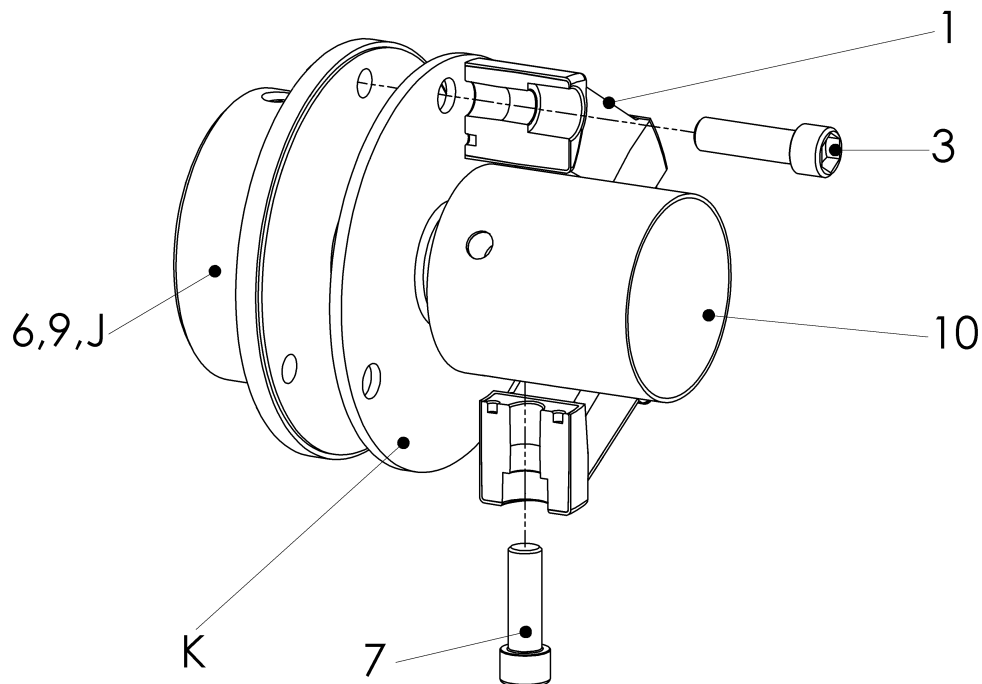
Mounting the tube, the centring flanges and the rubber elements (coupling sizes 00001...00012)
